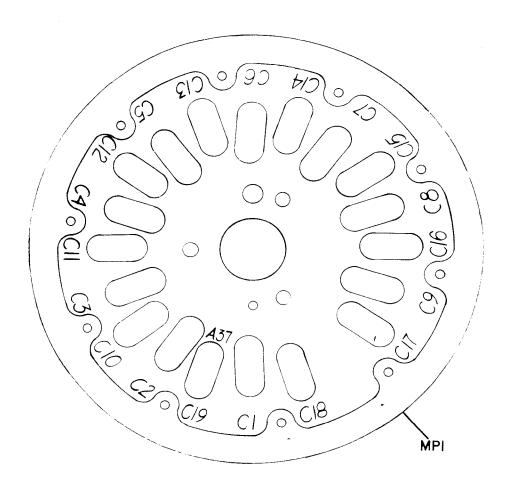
100 kHz Rotor Subassembly A2A4A37, Component Locations
